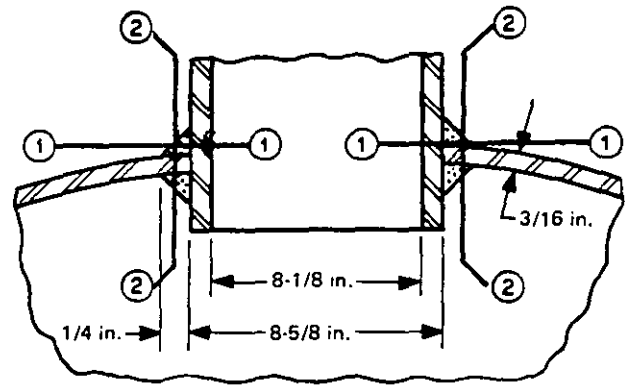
EXAMPLE OF REINFORCED OPENING
